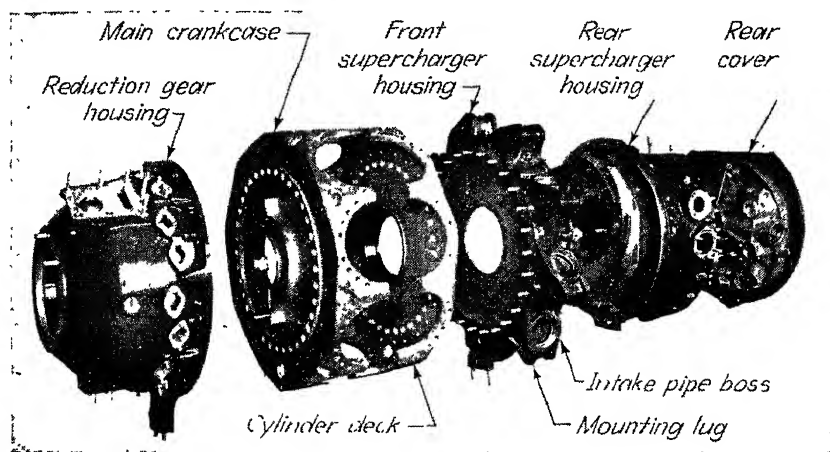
Exploded view of the crankcase of a nine-cylinder radial engine. (Wright Aeronautical Corp.)
